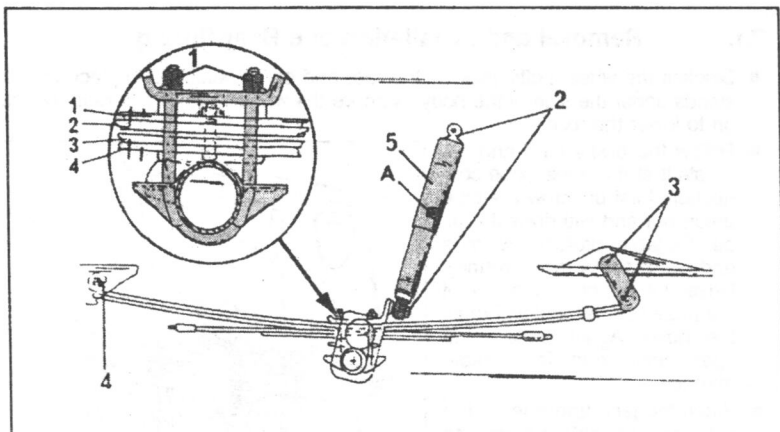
Side view of the rear suspension on one side in the case of two-wheel drive vehicles. The shock absorber identification can be found at (A).
